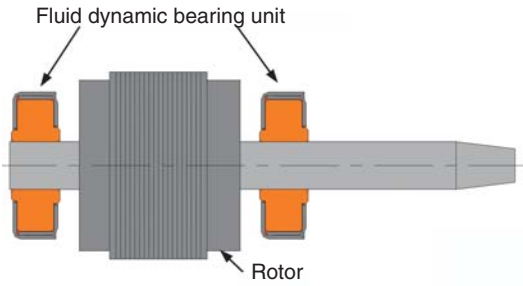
Schematic layout of rotor and fluid dynamic bearing unit
